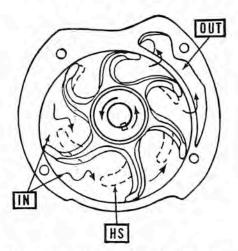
Schematic view of rubber impeller type water pump. Flexing of impeller blades in offset housing causes water to be drawn through inlet ports (IN) and forced into power head through outlet ports (OUT). At high speeds, blades remain curved as shown by broken lines (HS) and pump becomes a centrifugal pump.
